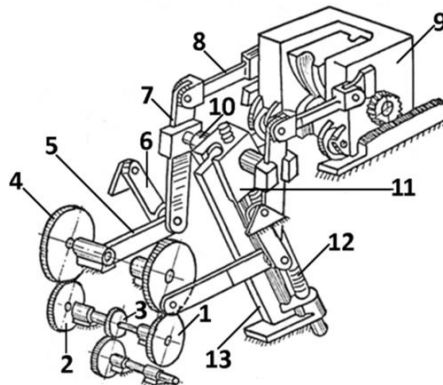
Scheme of the lever drive mechanism of the KhPTK mill [3]
